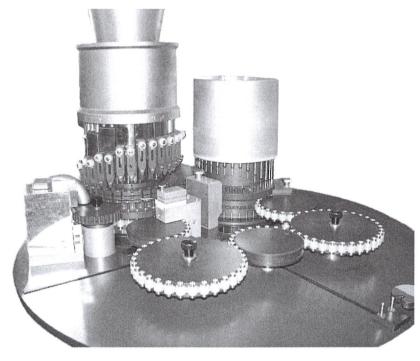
The photo shows the various machine zones in which the capsules are handled.
